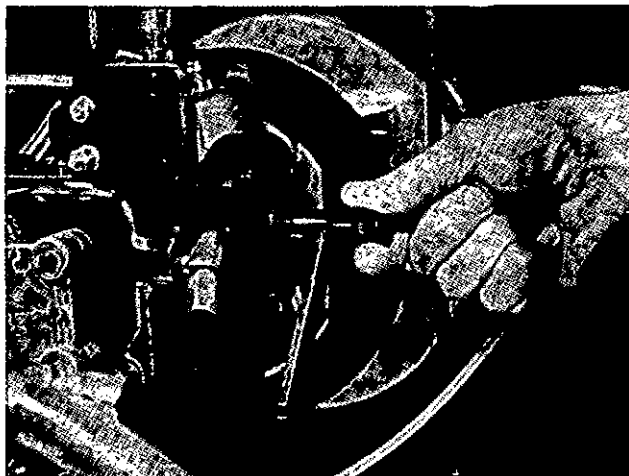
, (F5399). Set the AFC plunger position with the service tool 3375137.
